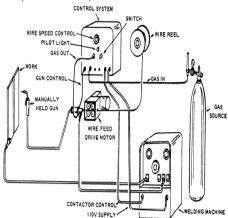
Metal Inert Gas Welding (MIG)
